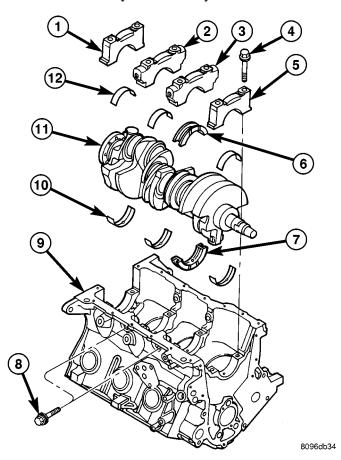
CRANKSHAFT AND BLOCK - 3.8L
